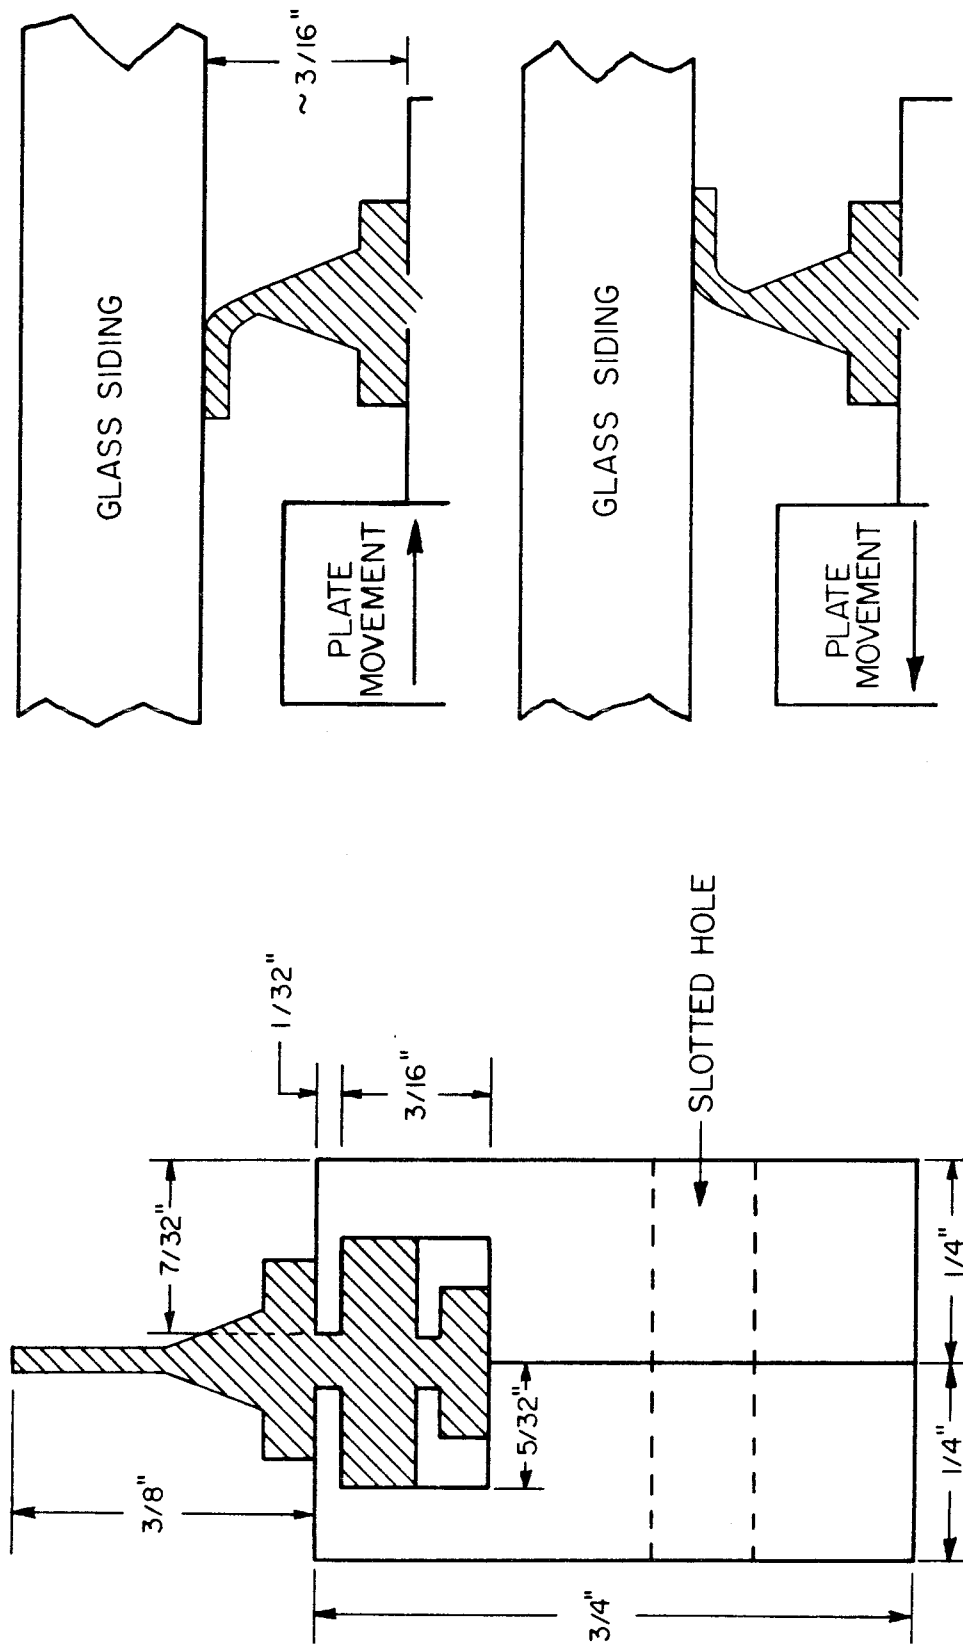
Drawing of the blade holder (after Goring, 1978).
